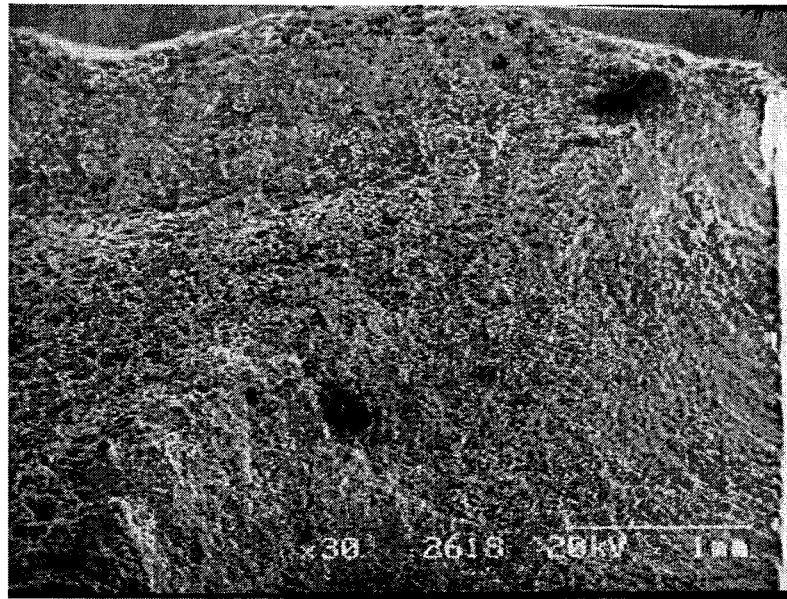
Fracture surface of fatigue specimen with the magnification at 30 times. The material is monolithic Al 2618
